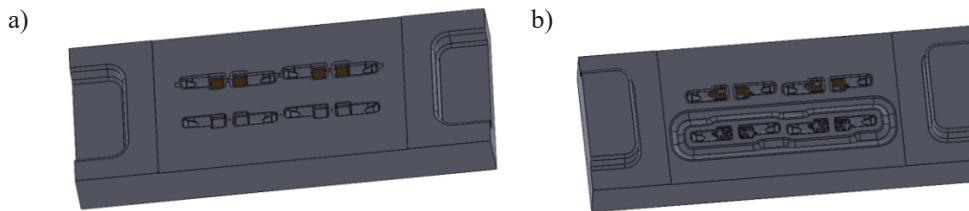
Forging tool construction in the arrangement: element-element rotated by 180°, with folding 40×90 mm: a) lower die, b) upper die
